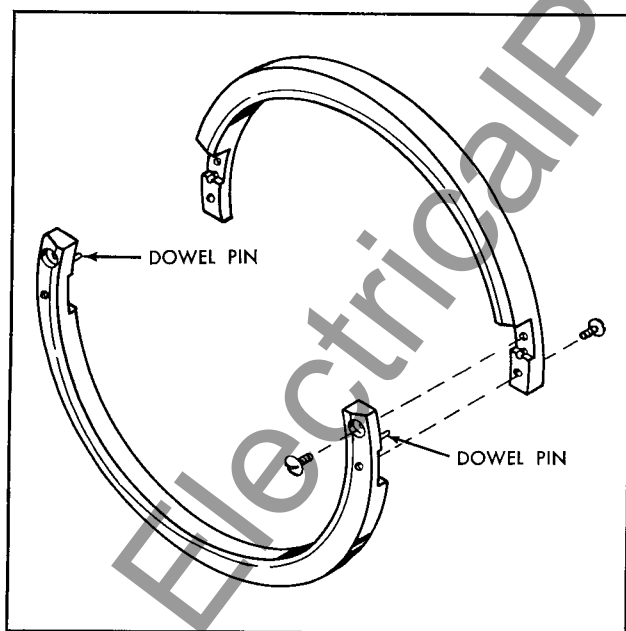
Oil Ring Used in Sleeve-Type Bearings
